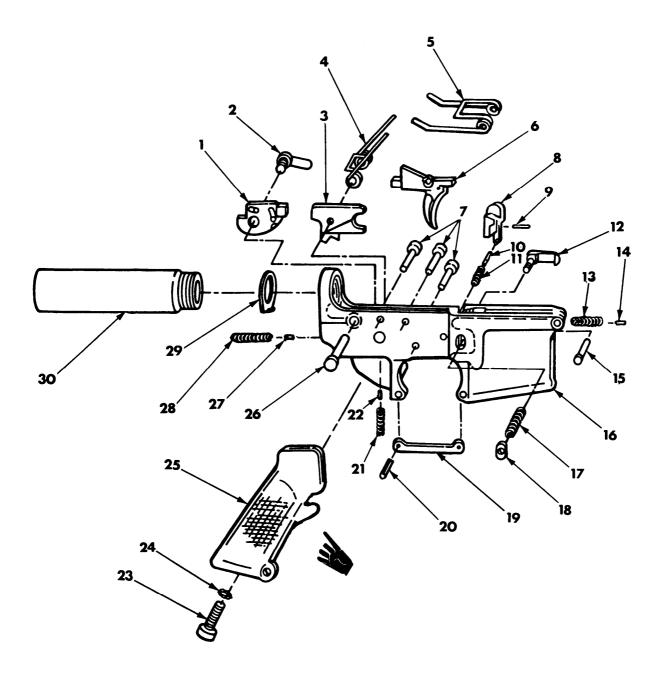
Lower Receiver and Receiver Extension Assembly (9327230) (Group 04).
